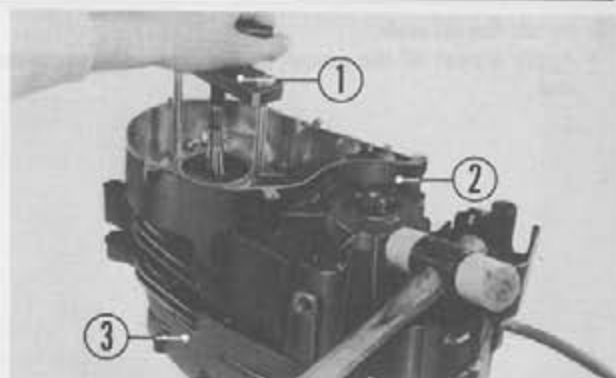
① Crankcase puller ② Left crankcase ③ Right crankcase
